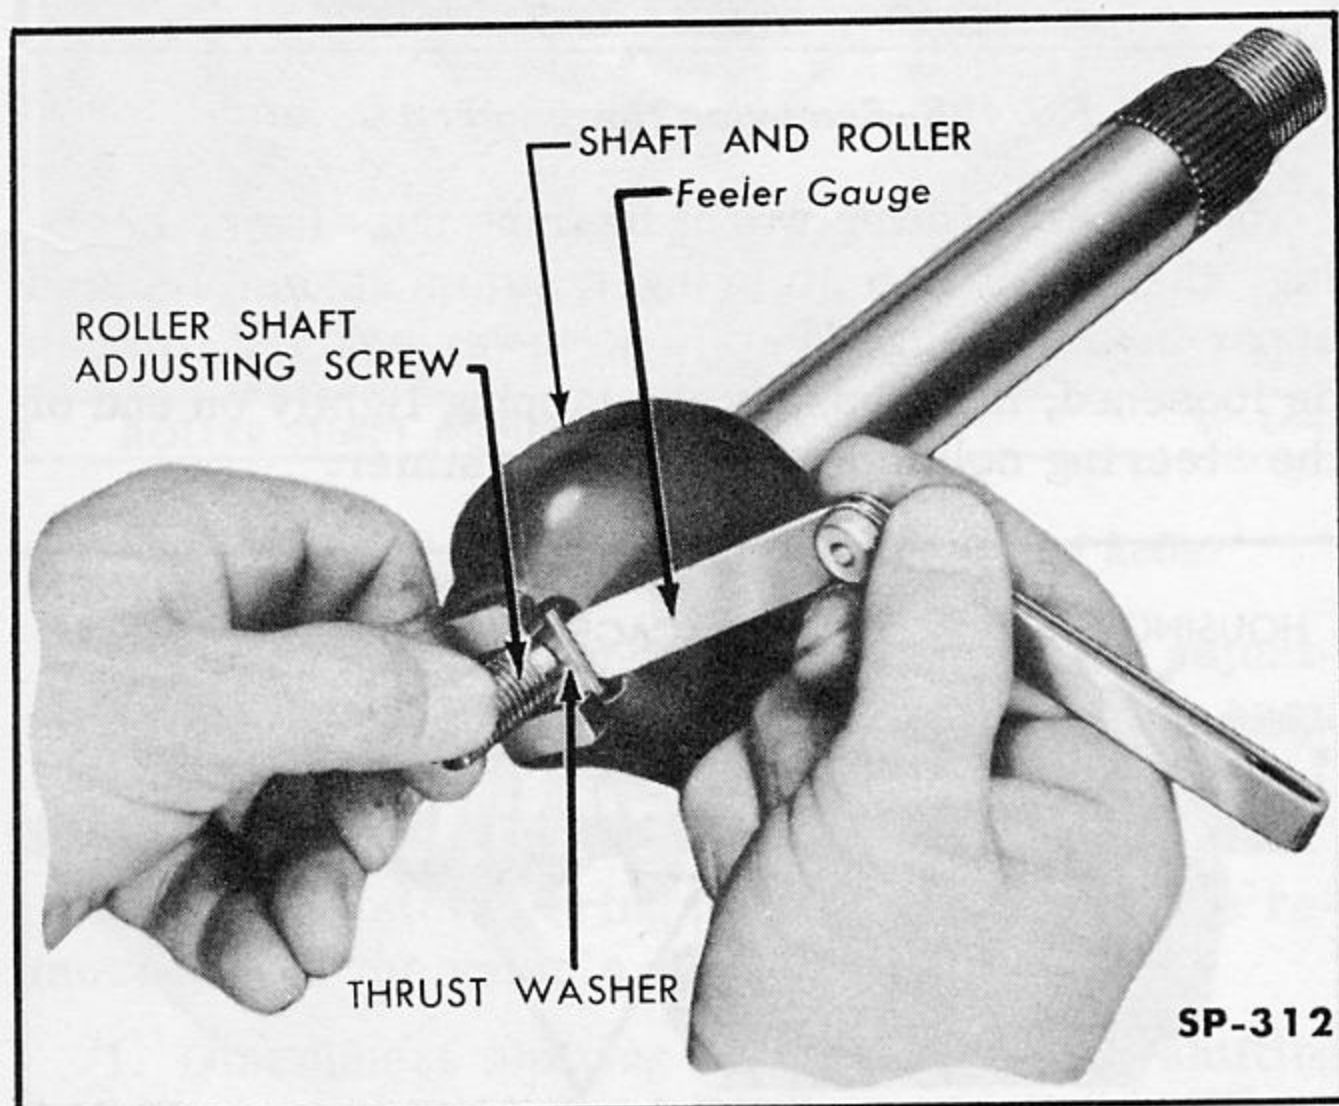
Checking Roller Shaft Adjusting Screw Clearance
